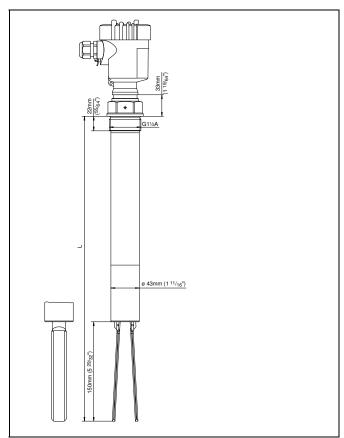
VEGAWAVE 63 - threaded version G11/2
